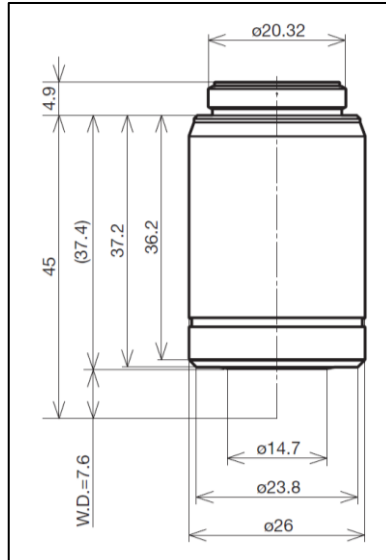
Mechanical Drawing of the SLMPLN100X Objective [27].
